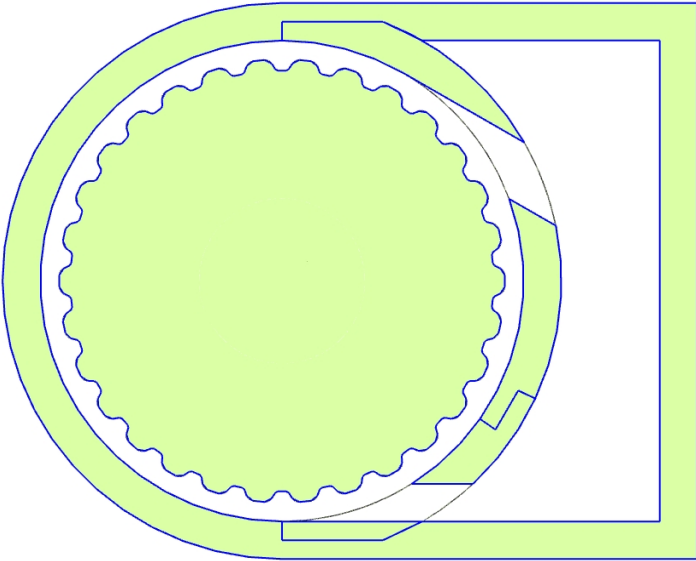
Section view of wet clutch housing with 30-degree outlet.
